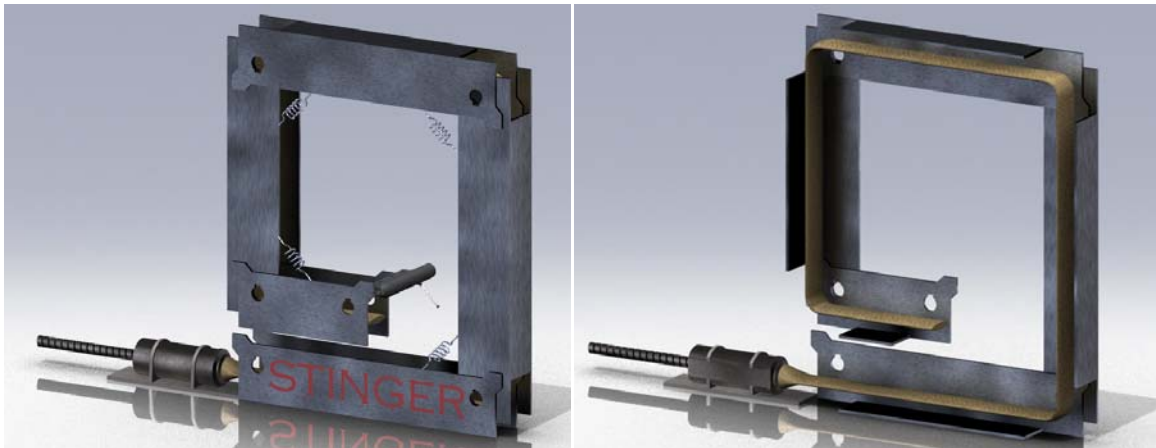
Depressurized, retracted STINGER, held closed by springs (with cross section)
